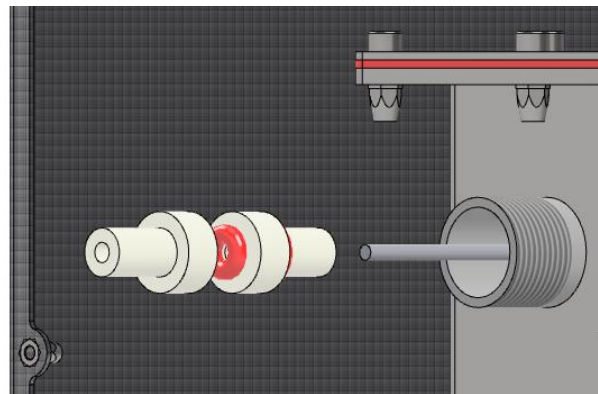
Carefully remove the ceramic feedthrough tube and seals (similar to picture)
